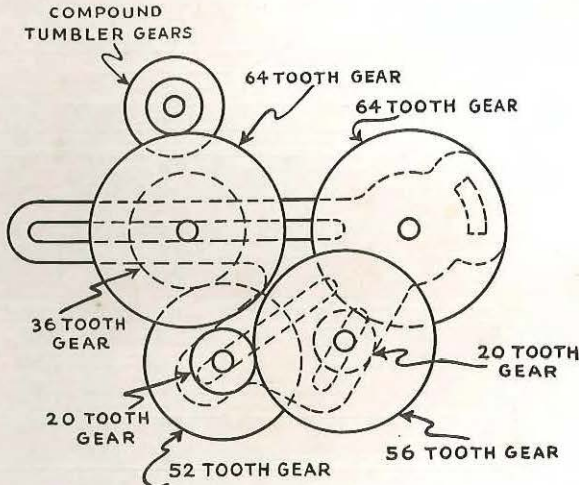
Gear set-up for .0024 inch carriage feed (see page 148).
